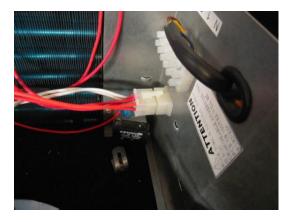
Step 7: Plug in the electric heater wiring to the connector shown above.
